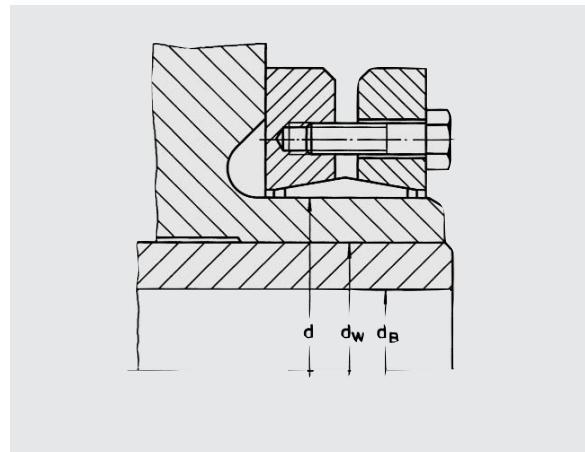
· RINGFEDER® Shrink Disc application using a hollow shaft
